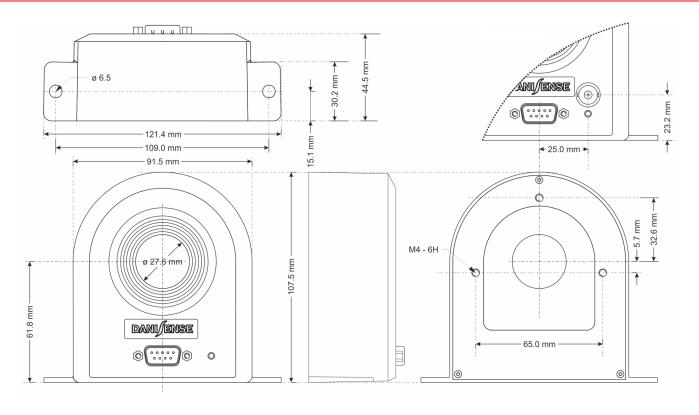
Dimensions of sensor head. Tolerance is 0.3 mm
